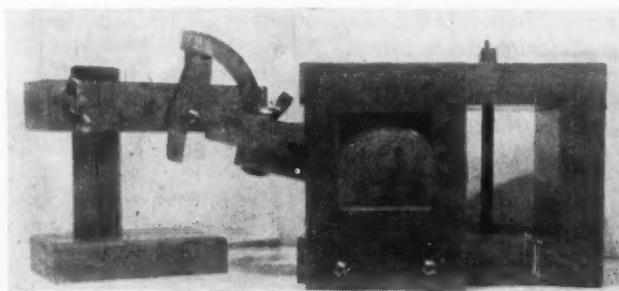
WOODEN MODEL SHOWING UNIVERSALLY ADJUSTABLE TOOL
